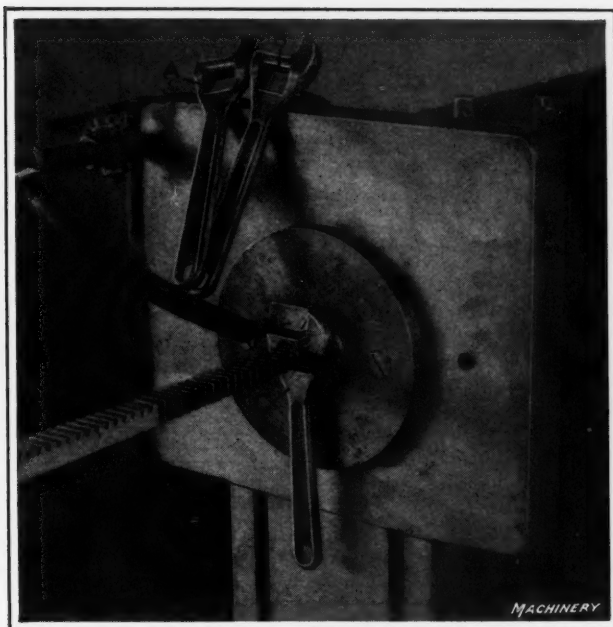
Broaching a Rectangular Opening in a Wrench Part
